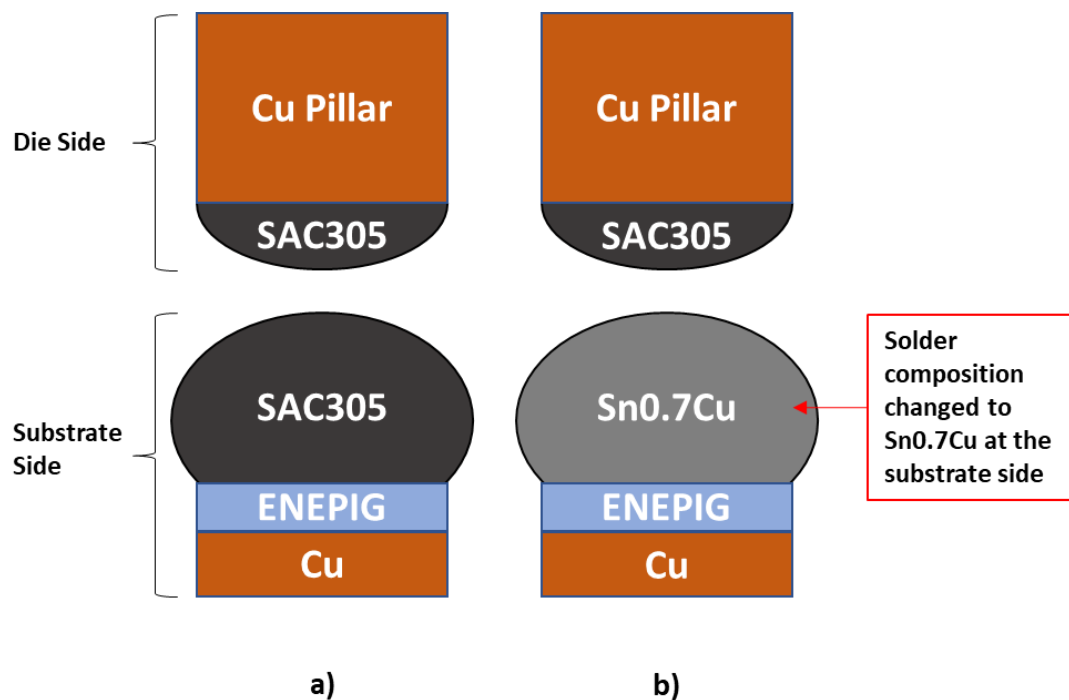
Schematic cross section of devices using a) SAC305 solder at the substrate side and b) Sn0.7Cu solder at the substrate side.
